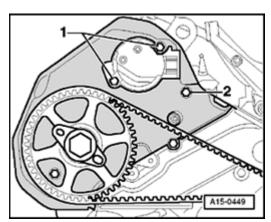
Unscrewing Bolts And Removing Bracket With Idler Roller & Toothed Belt Guard At Right Rear
